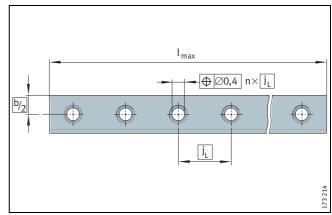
· Positional and length tolerances of guideways – hole pattern to ISO 1101
